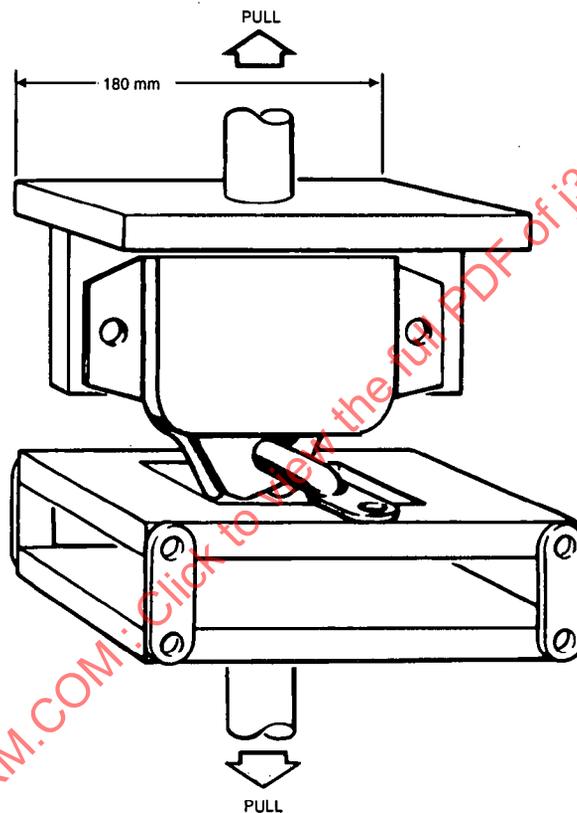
SUGGESTED HOOD LATCH STATIC TEST FIXTURE
